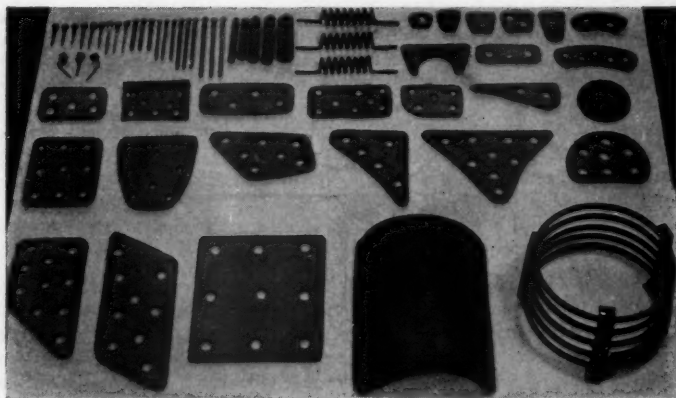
VARIOUS TYPES OF CHILLS USED IN MAKING STEEL CASTINGS.
